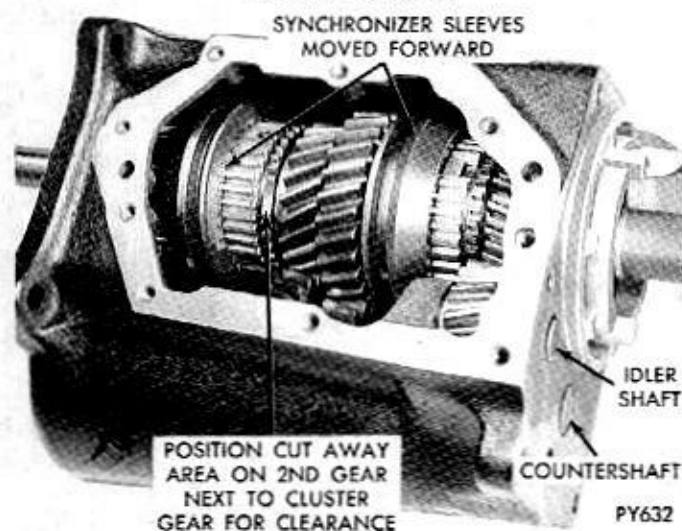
Position 2nd Gear and Shift Sleeves for Clearance
